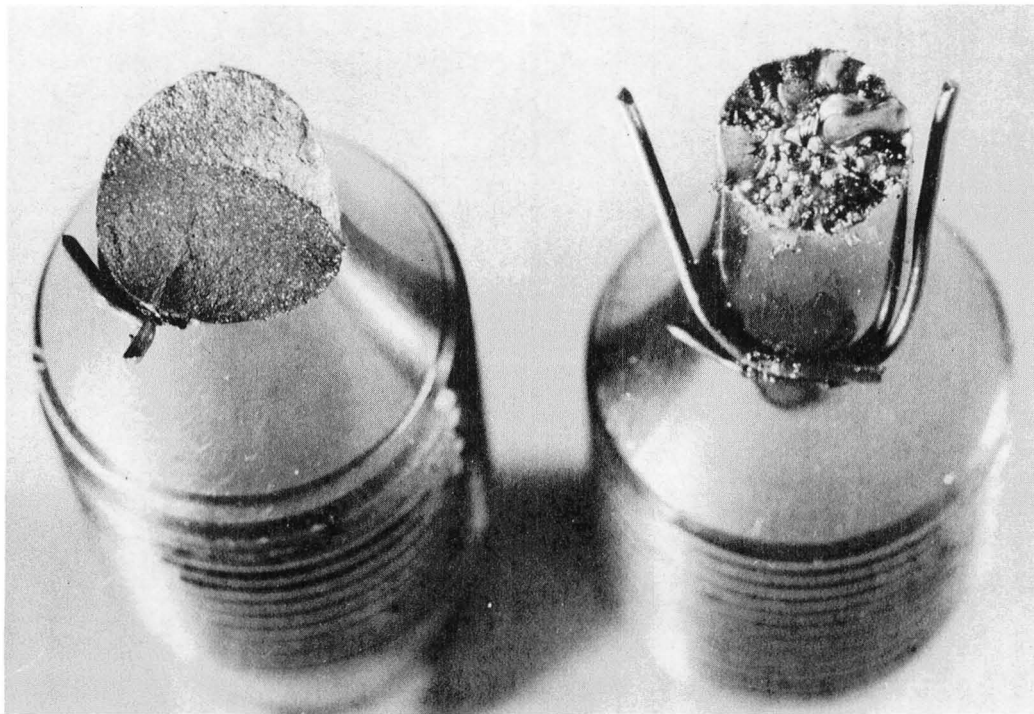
Photograph of Fracture Surfaces of Rene' 95 Low Cycle Fatigue Test Specimens Showing (Left) Fracture Initiation at Thermocouple Weld and (Right) Recast Layer on Fracture Surface.
